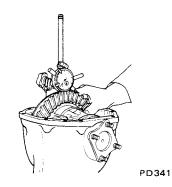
Measuring Backlash of Ring Gear and Pinion
